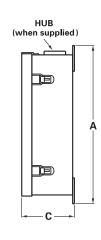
, Enclosed CR360L Type 12, 3R, 4/4X 3-point mounting
